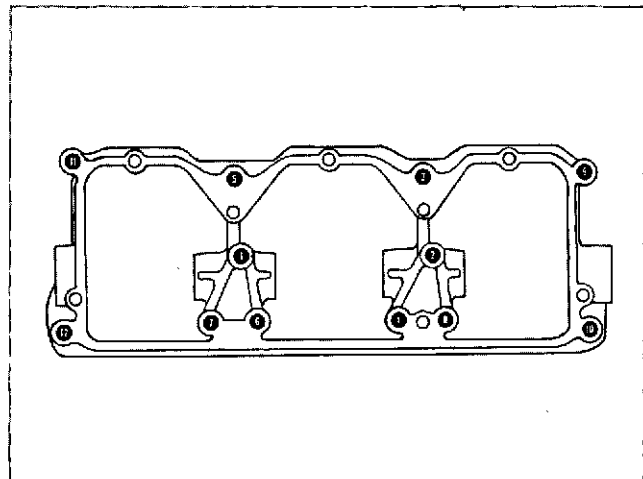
, V41451. Rocker housing capscrew torquing sequence
